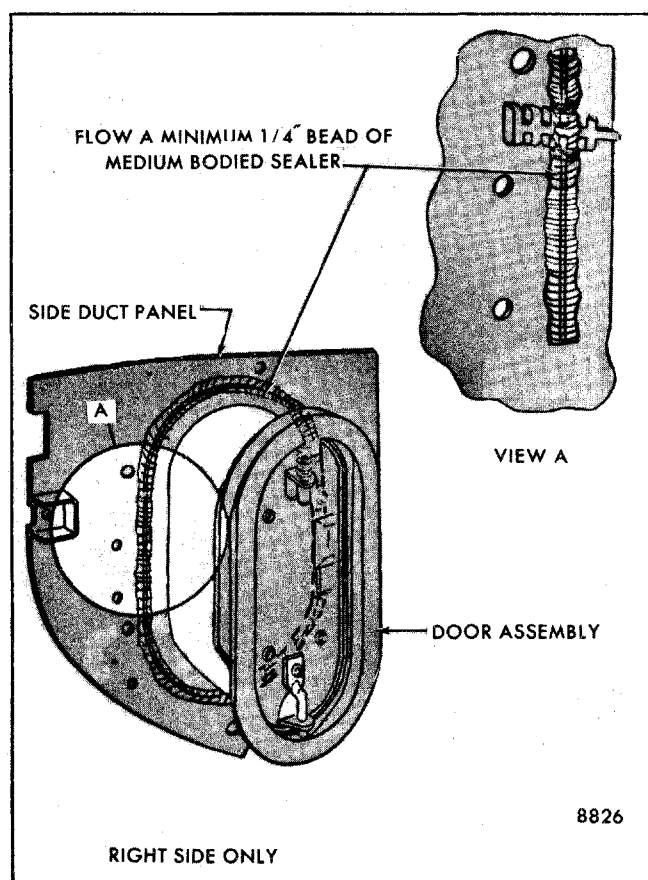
Side Duct Panel and Door Assembly Sealing
